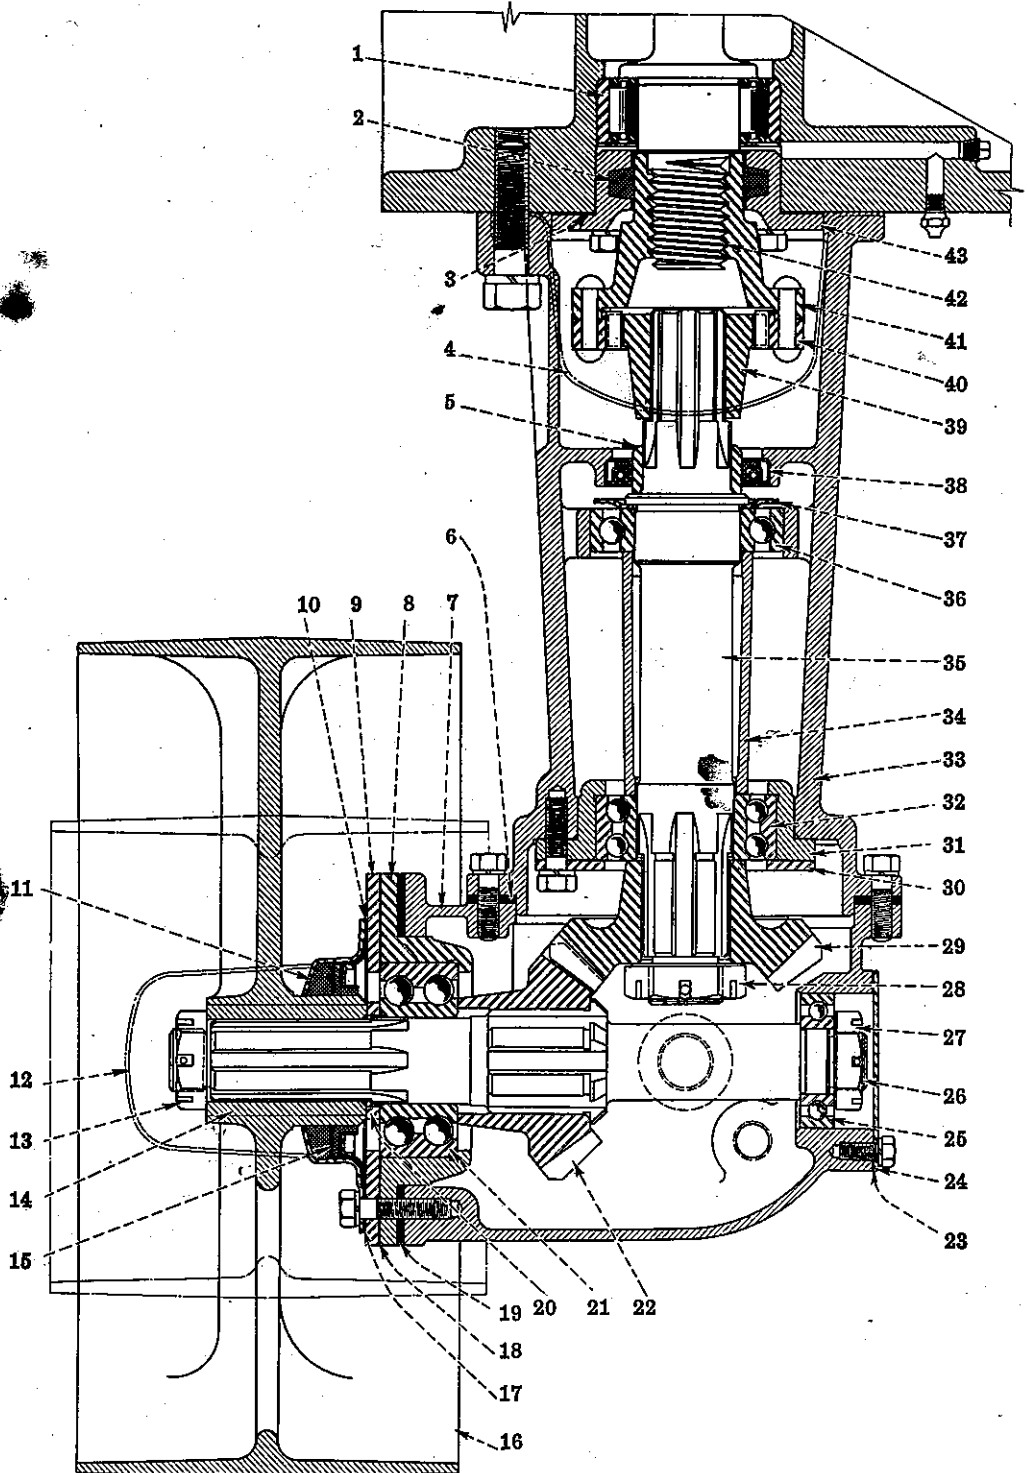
Illustration No. 89—Belt pulley and power take-off assembly (special) (top view).
